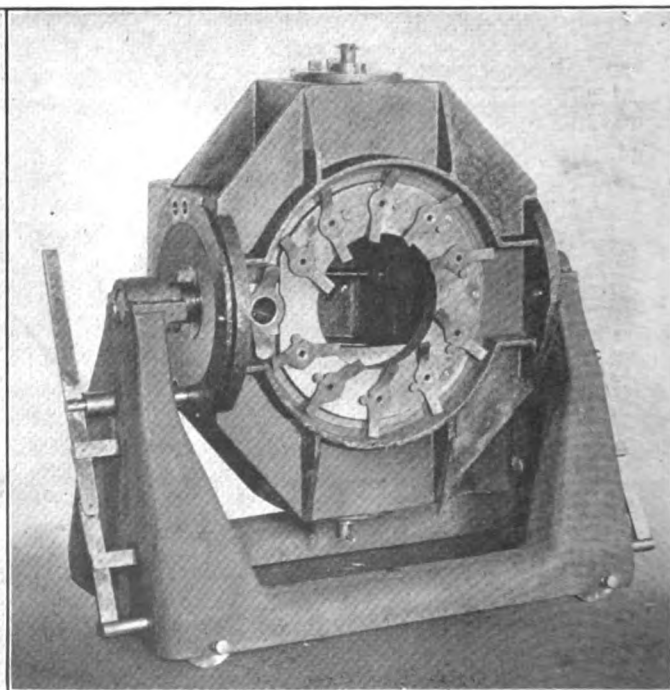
THE HOUSING HOLDER TURNED OVER, SHOWING SMALLER SLIP BUSHINGS
